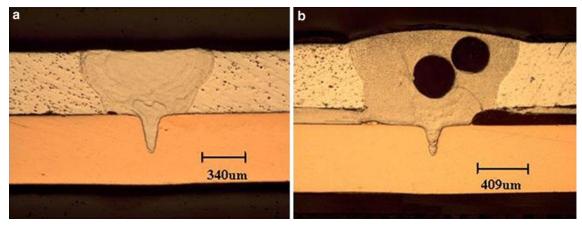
Al-Cu laser weld (a) without Sn filler metal (b) with Sn filler metal [106].
